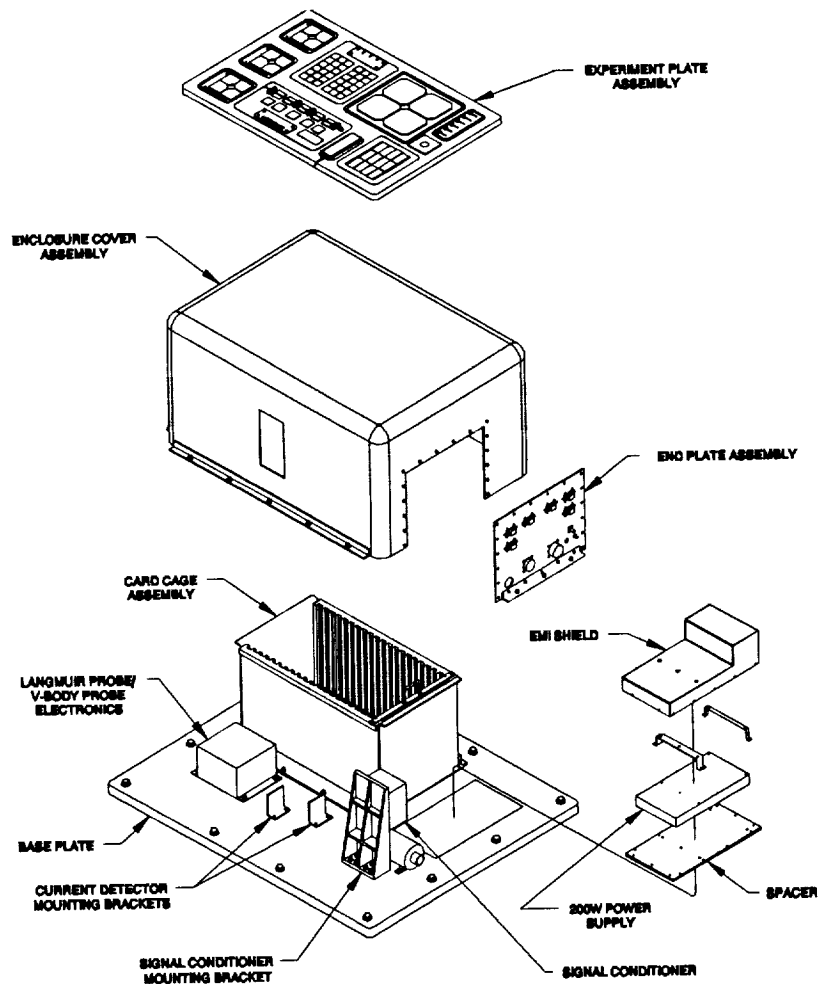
An exploded view of the SAMPIE electronics box and sample tray.
